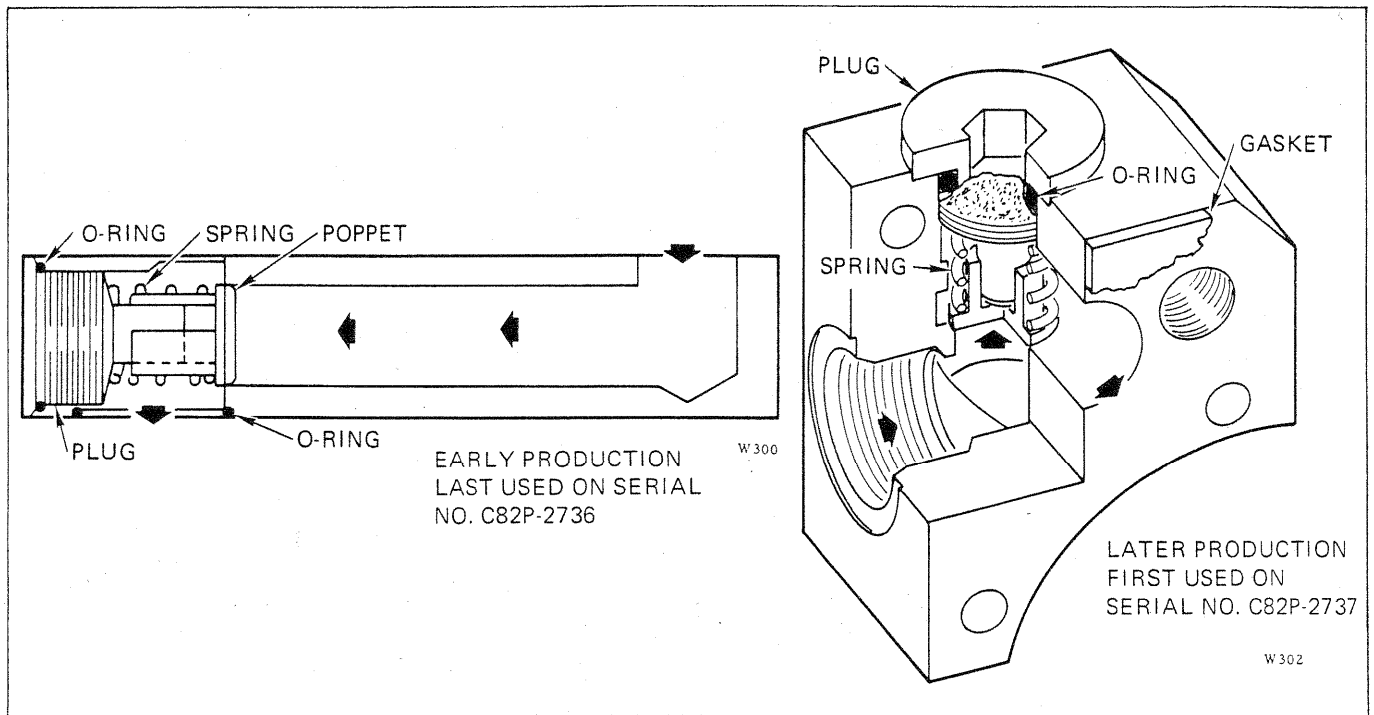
COOLING OIL RELIEF VALVE ASSEMBLY, POWER CONTROLLED WINCH
